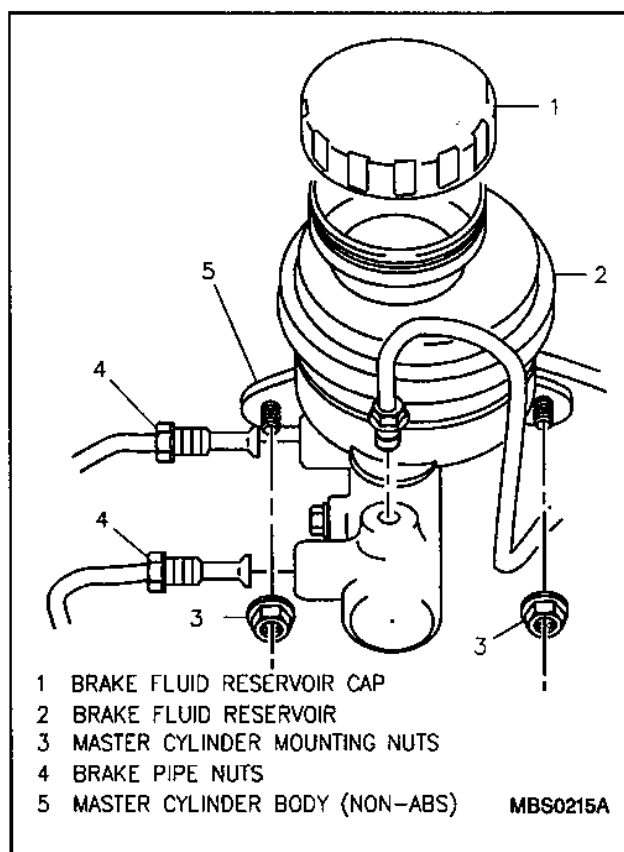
Master Cylinder Brake Pipes-Typical (Non-ABS Shown)
